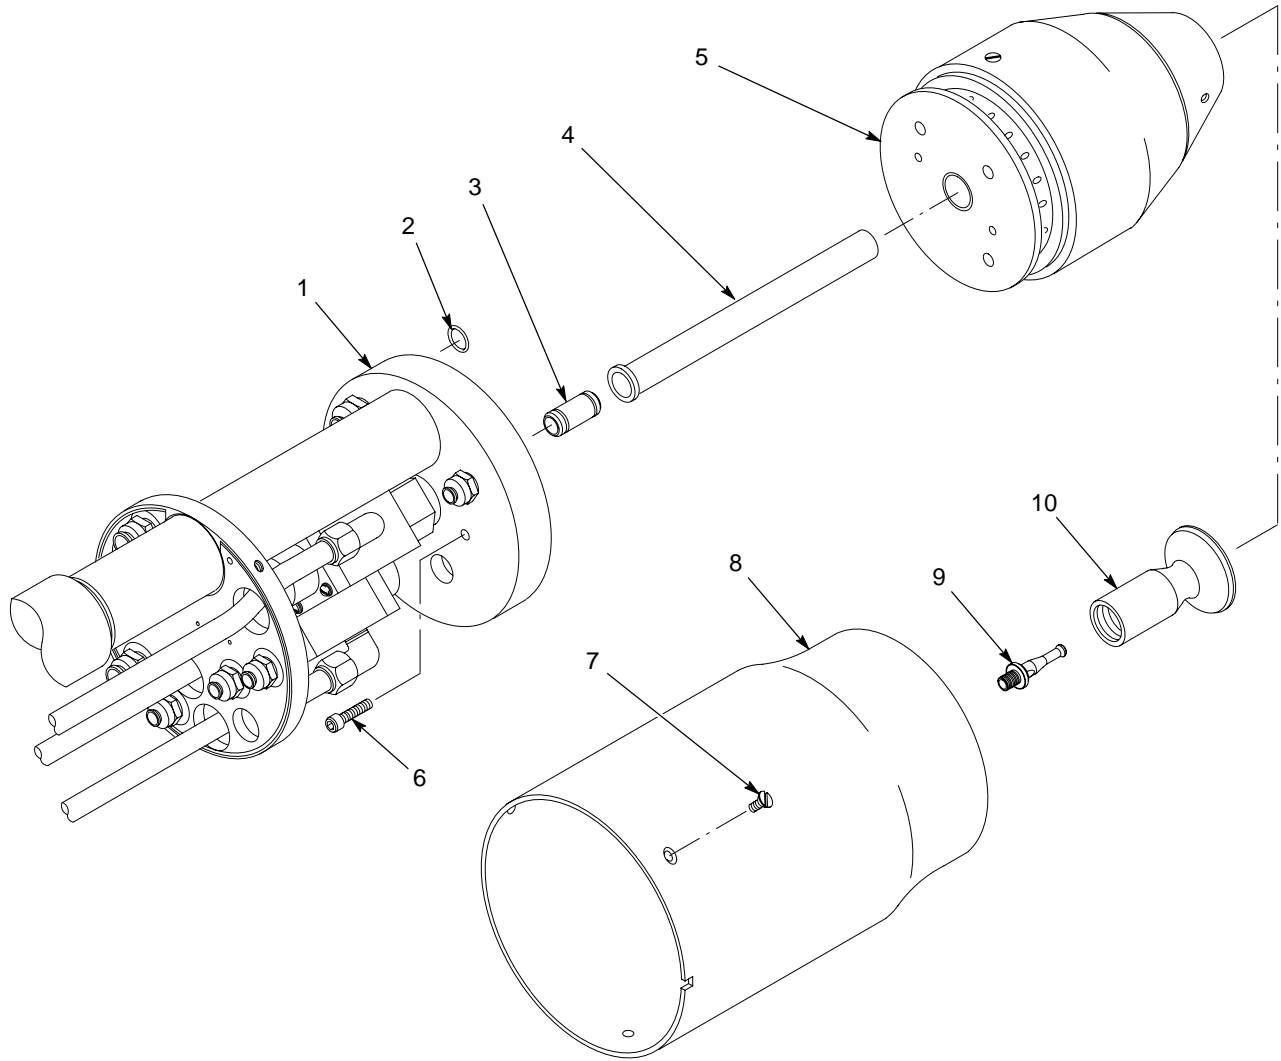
Removing and Installing the Nozzle and Fluid Tube
